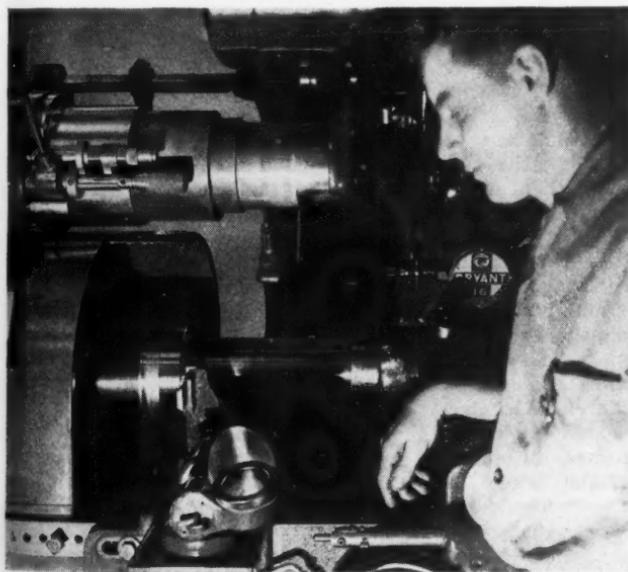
The Bore in the Cylinder Barrel is Finished to Size by Grinding in the Bryant Internal Grinder. The Machine Stops when Correct Size is Obtained
